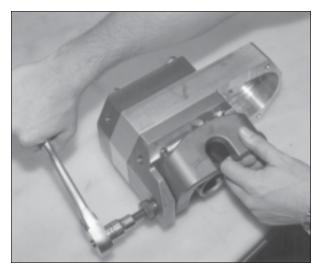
Loosen shoulder bolts and latch assembly from bottom plate.
